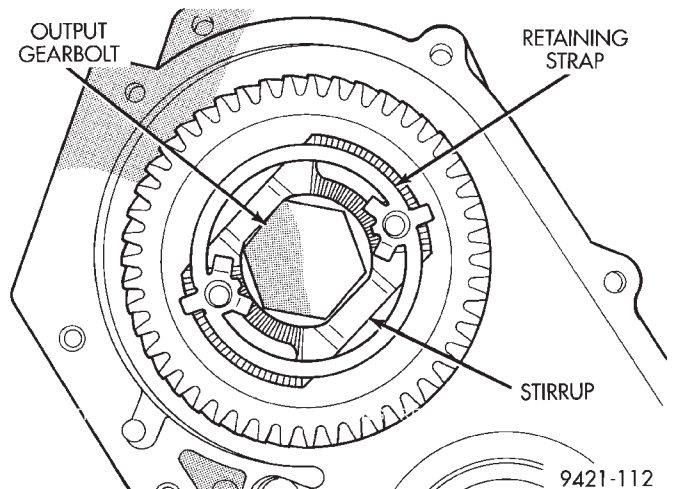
Stirrup Strap (Align Strap Holes With Tapped Gear Holes)
